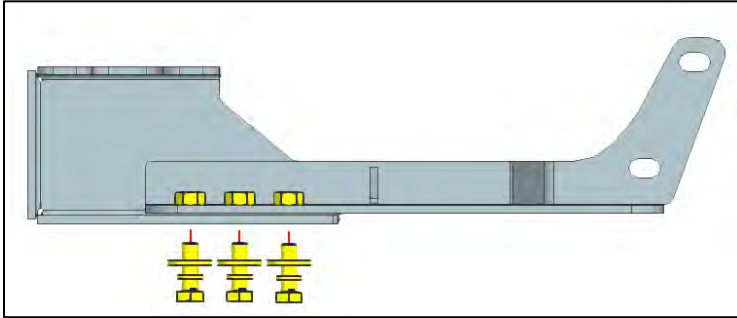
Install the PS mounting bracket 1 using the double bolt plate
